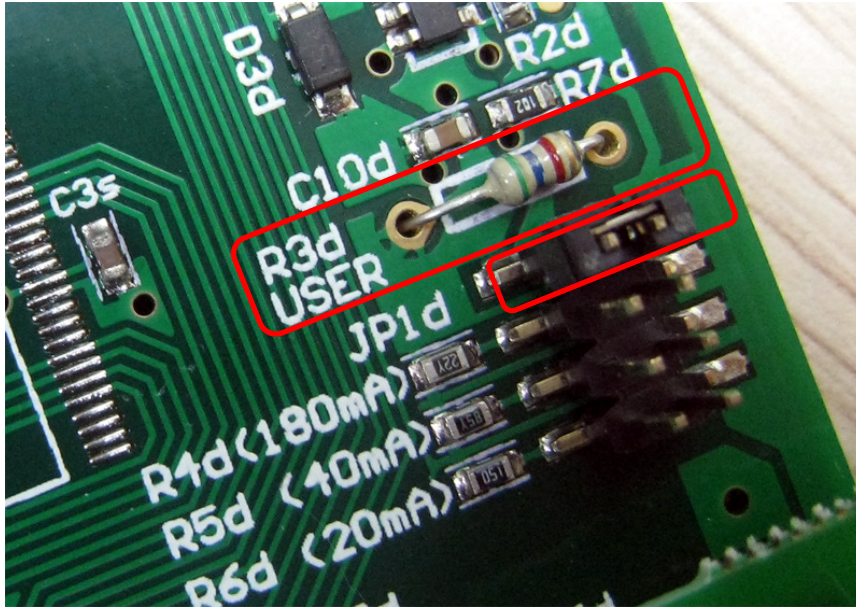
Solder a resistor for user selectable backlight current and close jumper at pin 7&8 to complete the circuit.
